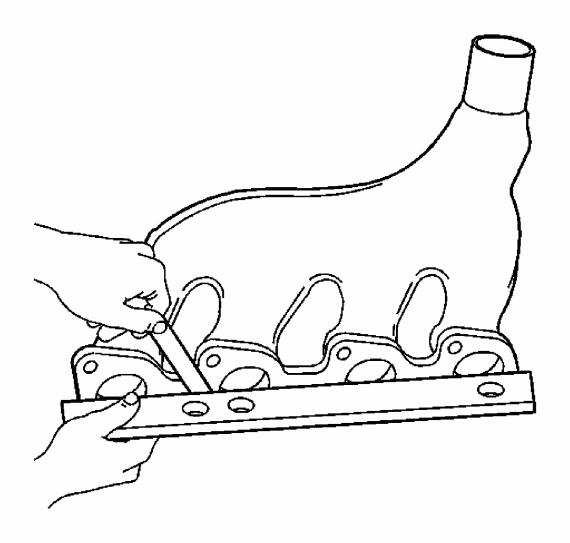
Measuring Surface Flatness Of Left Exhaust Manifold Flanges Courtesy of GENERAL MOTORS CORP.
